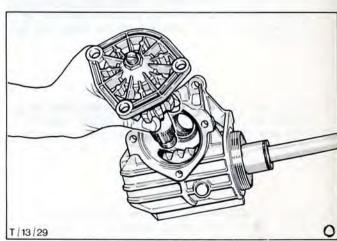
Assemble rocker shaft through housing ensure correct tooth mesh.
